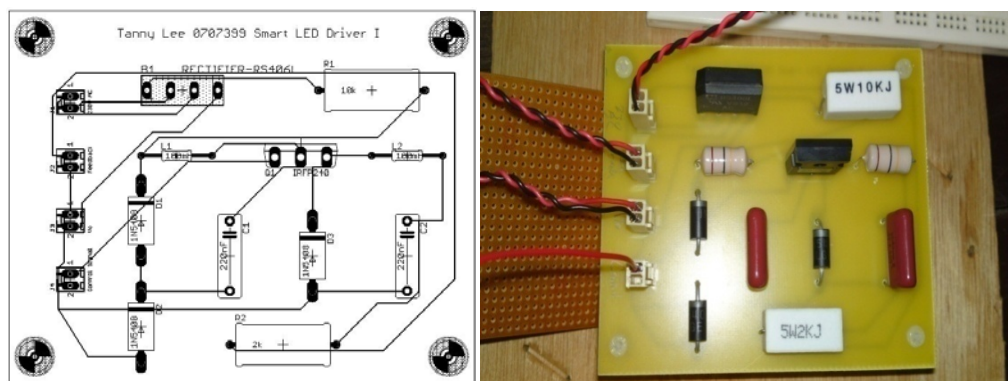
Quadratic buck converter schematic diagram (Left) and PCB final product (Right)
